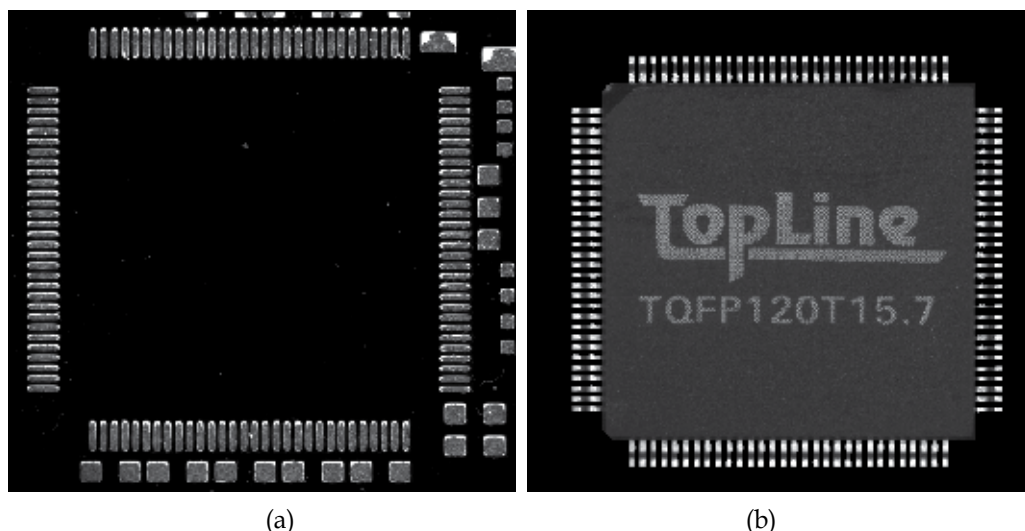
Pad and QFP component images; (a) pad and smeared solder paste, (b) the component QFP 120.
